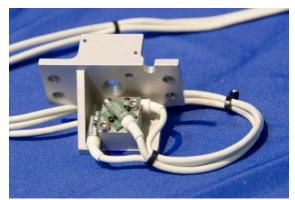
Attach accelerometers to block and secure to pelvis tri-pack mounting bracket
